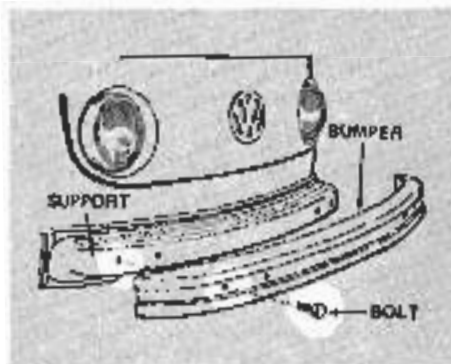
Front bumper removal and installation on 1973 and later models.
